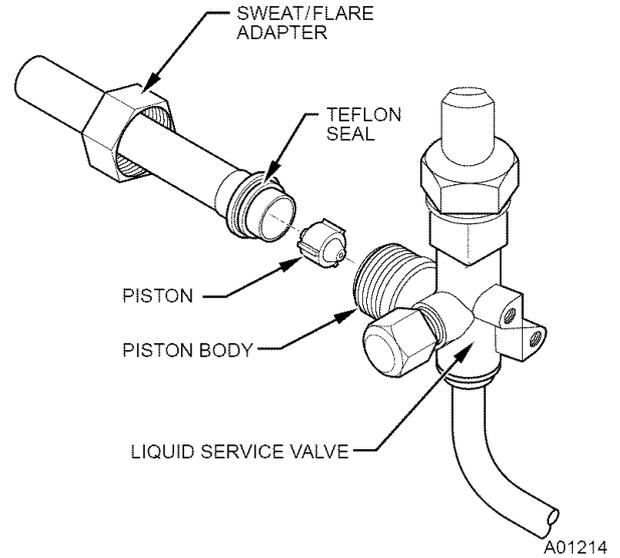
Liquid Service Valve with Sweat Adapter Tube
